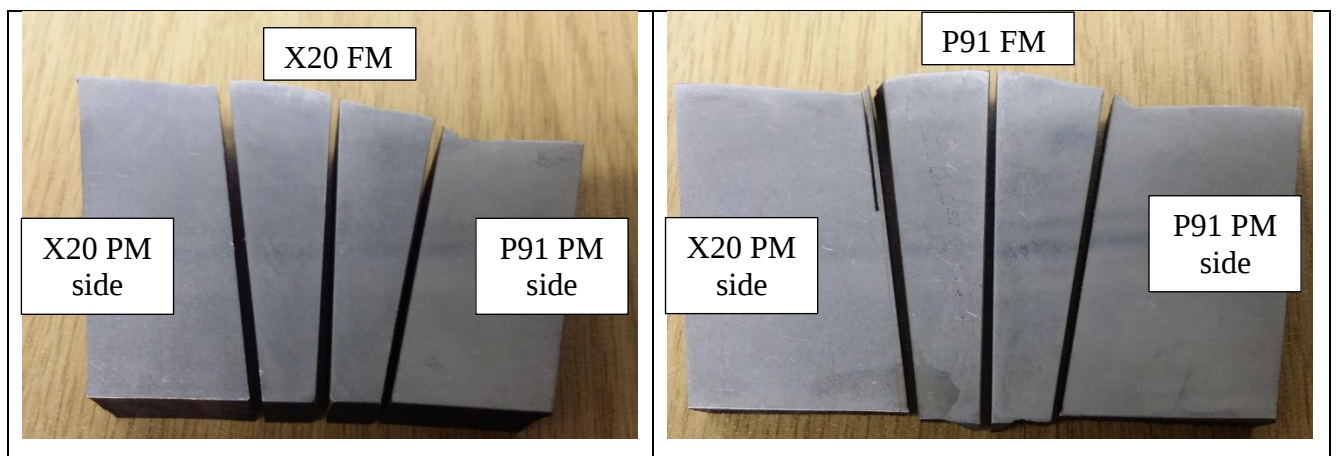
Photograph showing extraction of slithers where SPCT disc samples were removed.
